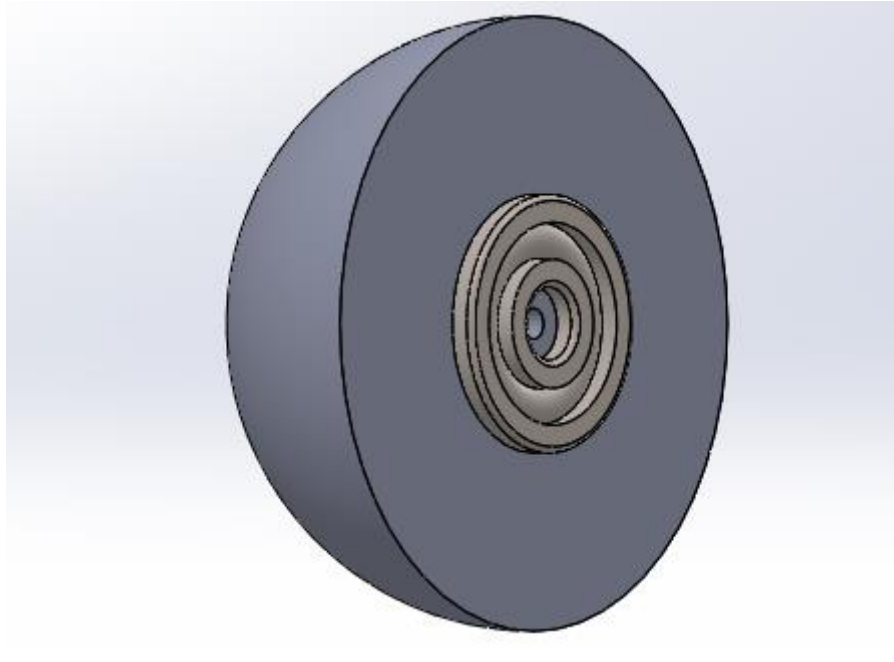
CAD Model of Prototype II of Wheel (Cross-Sectional View)
